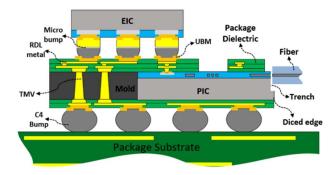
The cross-sectional layout of the optical engine is realized by fan-out wafer-level packaging. The package contains photonic integrated circuit chips that are encased within an epoxy mold compound and EICs mounted on the surface. The mold area that surrounds the PIC enables electrical routing to the substrate.
